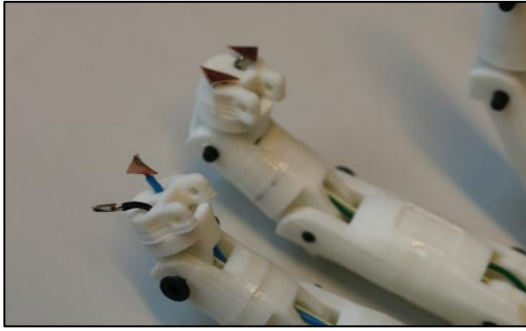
Welded copper triangles to the cable ends of the fingers.
